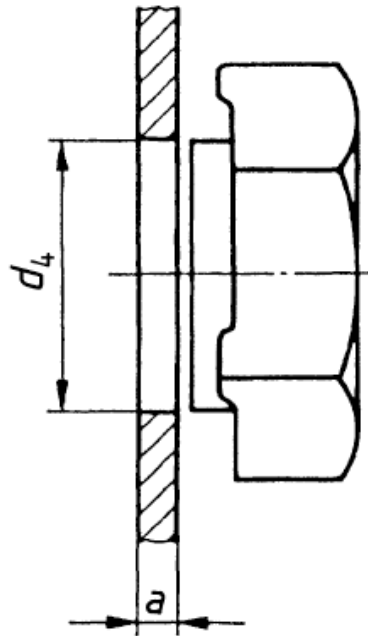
CONNECTING DIMENSIONS (NUT NOT WELDED ON)
